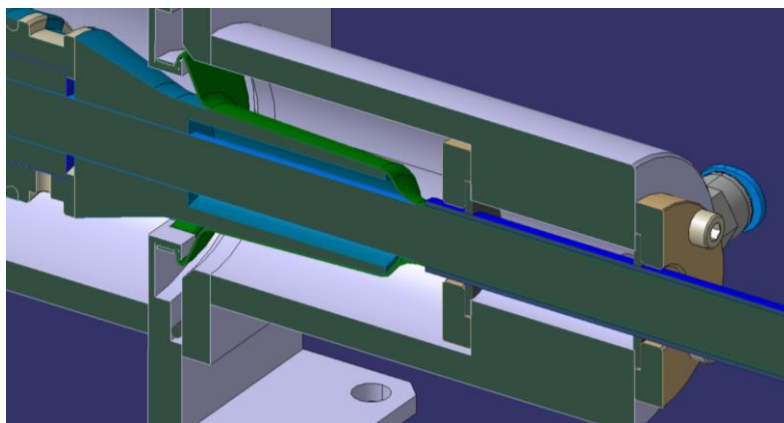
Cross-sectional view of the sealing chamber at the cable side.
